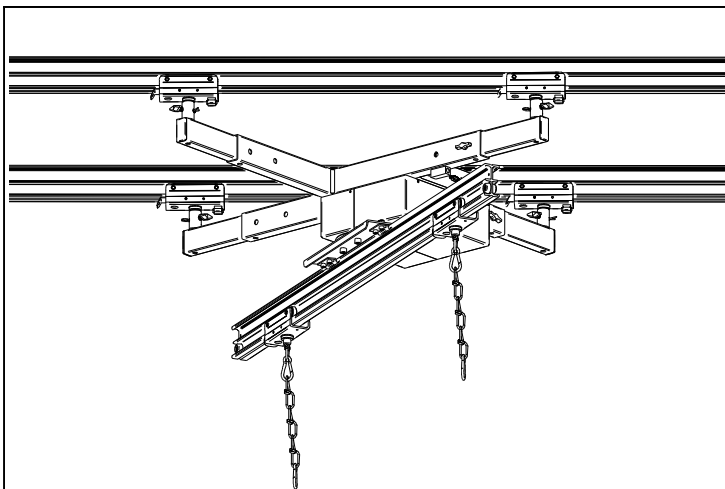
ORBITVU SPIDER hanging on rail ceiling system
